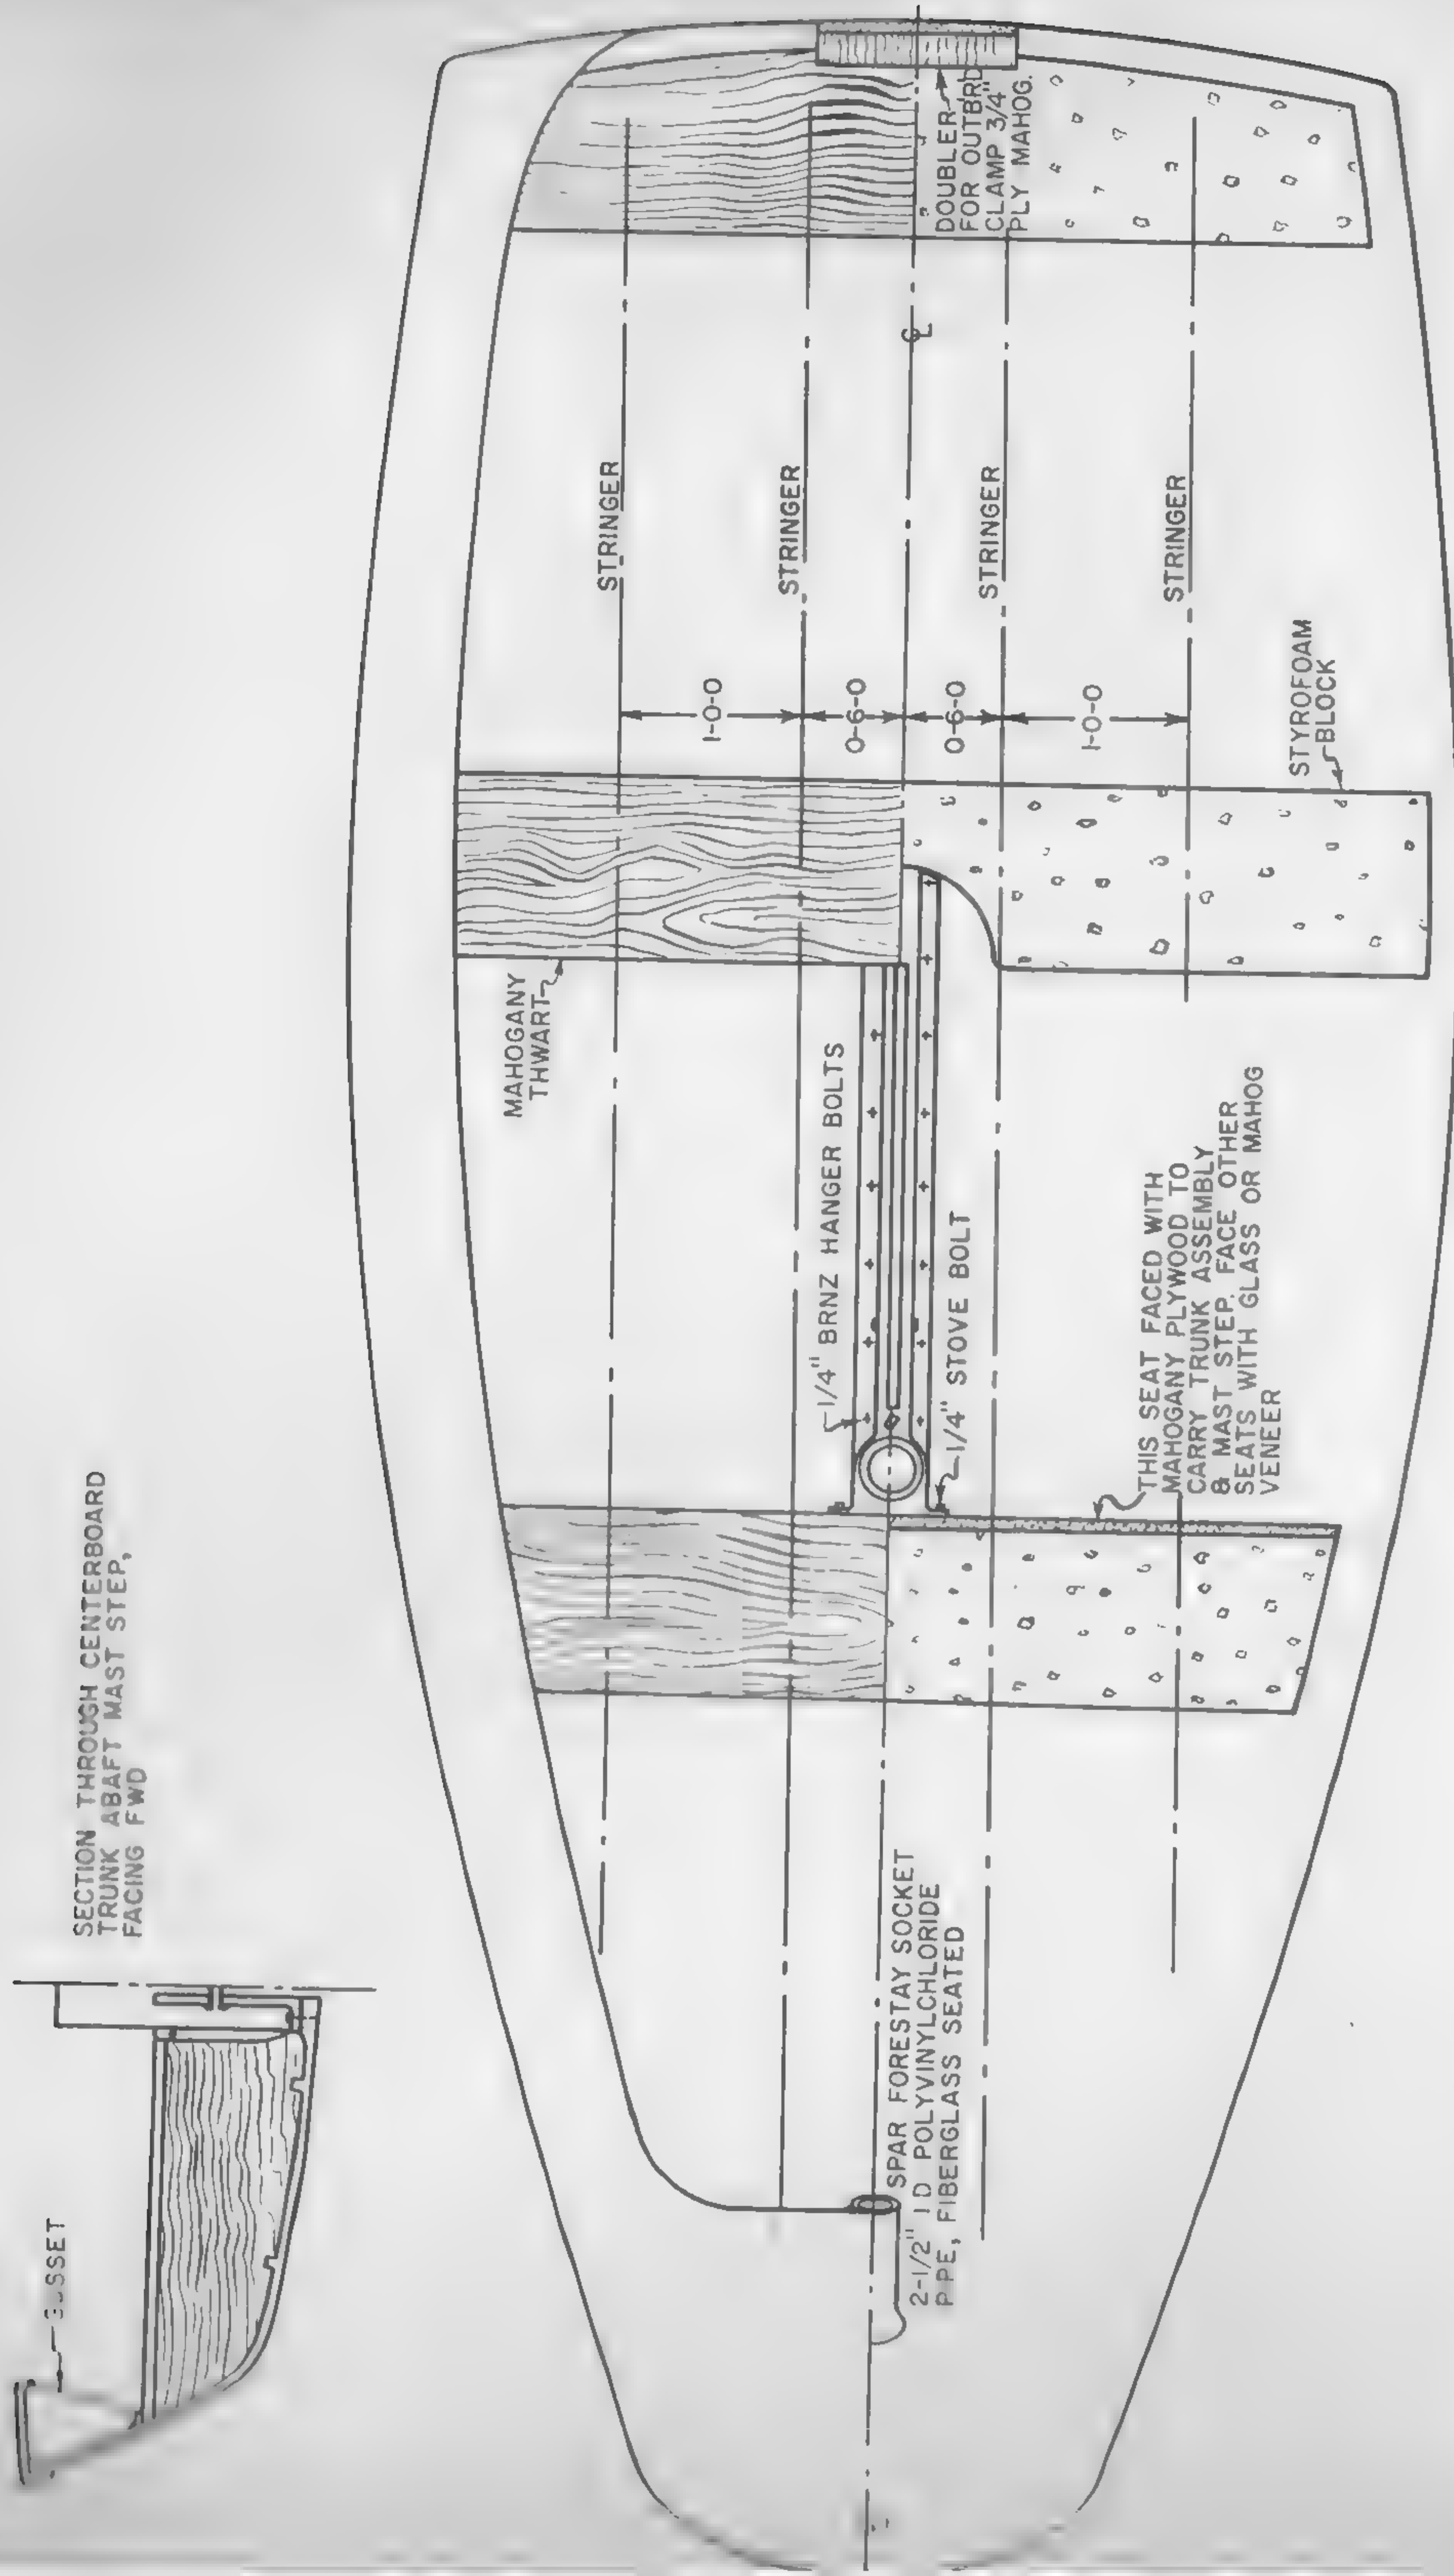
This page shows the construction plan of a 14' overall dinghy with a cantilevered mast and spar forestay. The mainmast step and centerboard trunk are molded fiberglass and are a continuous lamination. The trunk in this boat is designed to be bolted in place or removed and the slot covered with a filler plate, depending upon the requirements of the owner.
